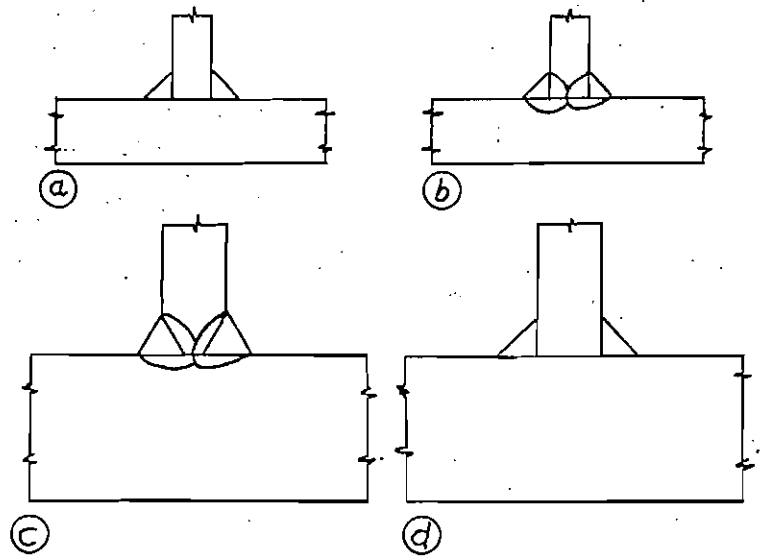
Summary of design recommendations relative to girder stiffeners.
